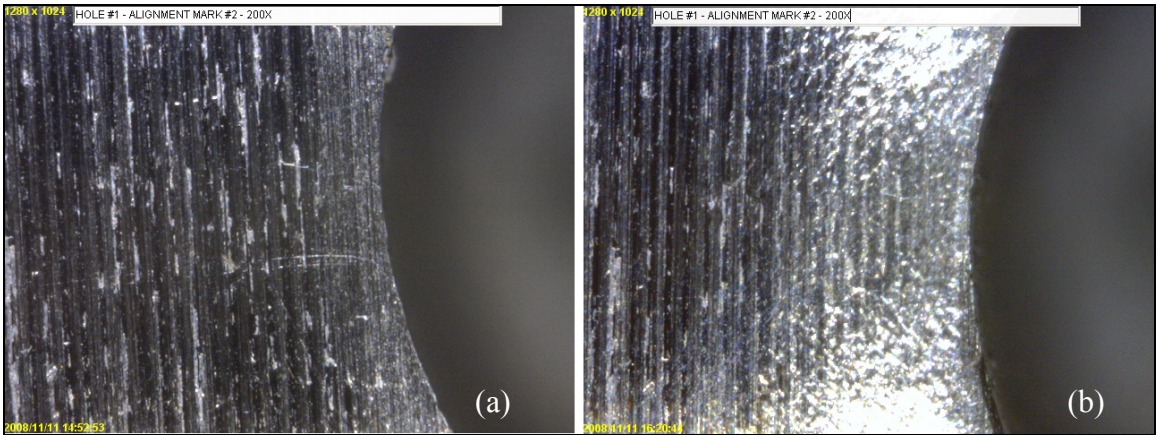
Photograph of Alignment Marks of Seal Drive Pin Hole
